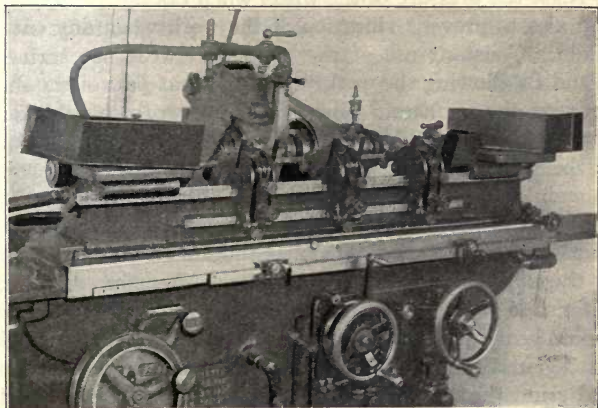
Brown & Sharpe grinding machine equipped with universal backrests.
